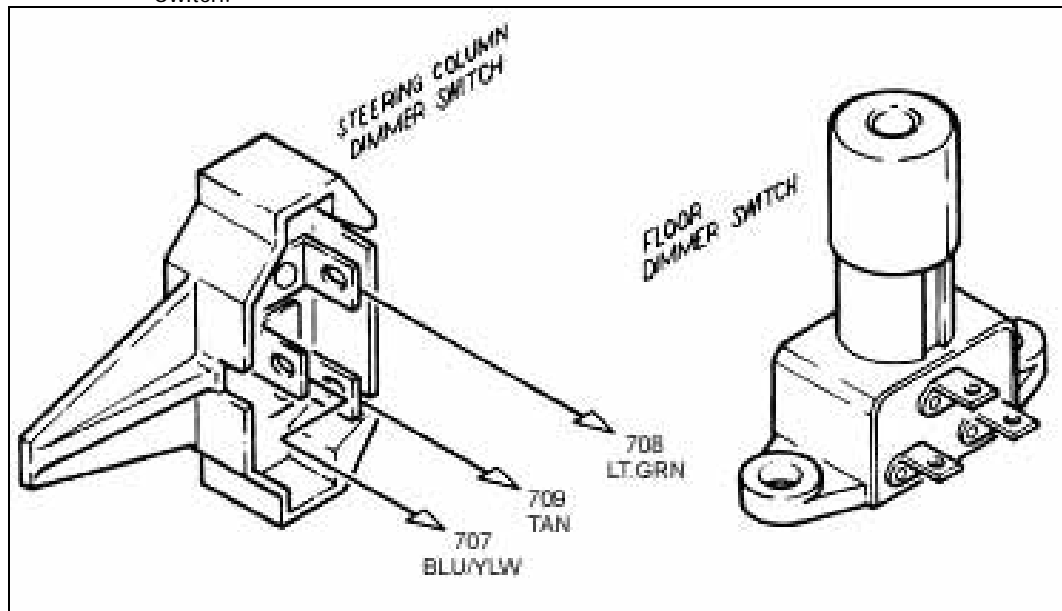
C Dimmer Switches (Push Button Style – Painless Part #80150)
